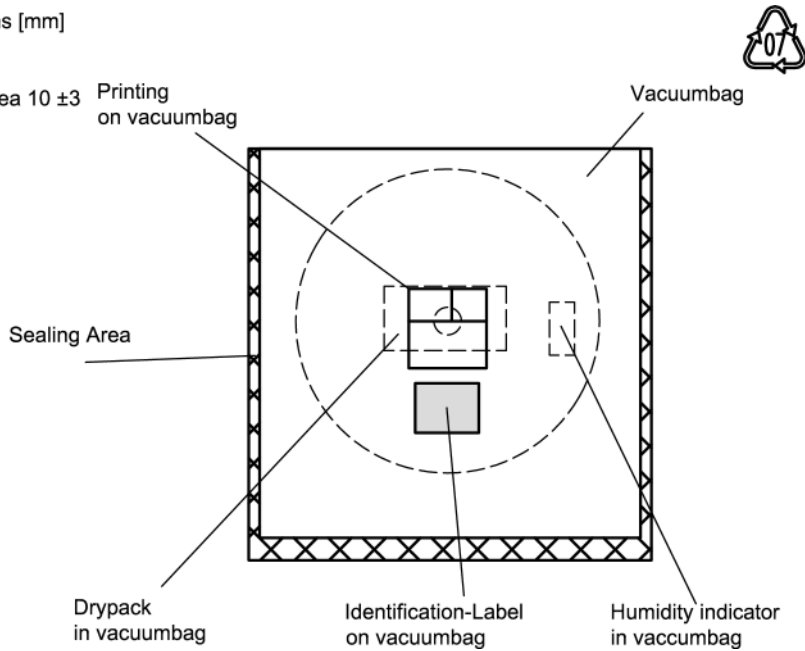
Drawing of moisture barrier bag (MBB) for reel with diameter of 180 mm.
